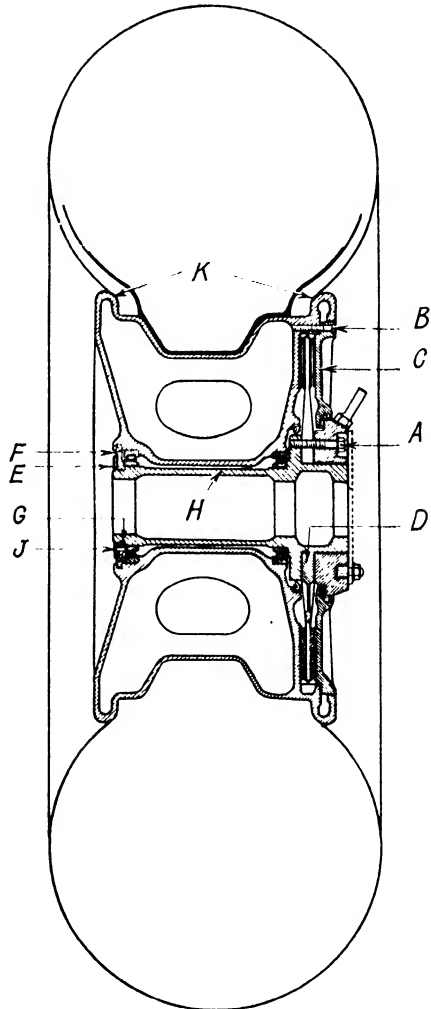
SECTIONAL ILLUSTRATION OF AVERY WHEEL AND BRAKE UNIT
